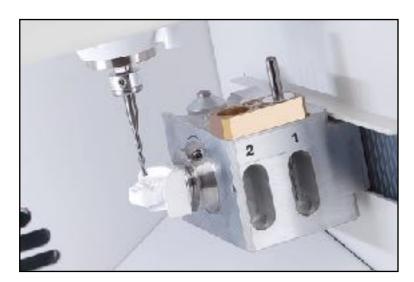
Example of dry milling machine (Roland DWX-52D - Roland, California)
